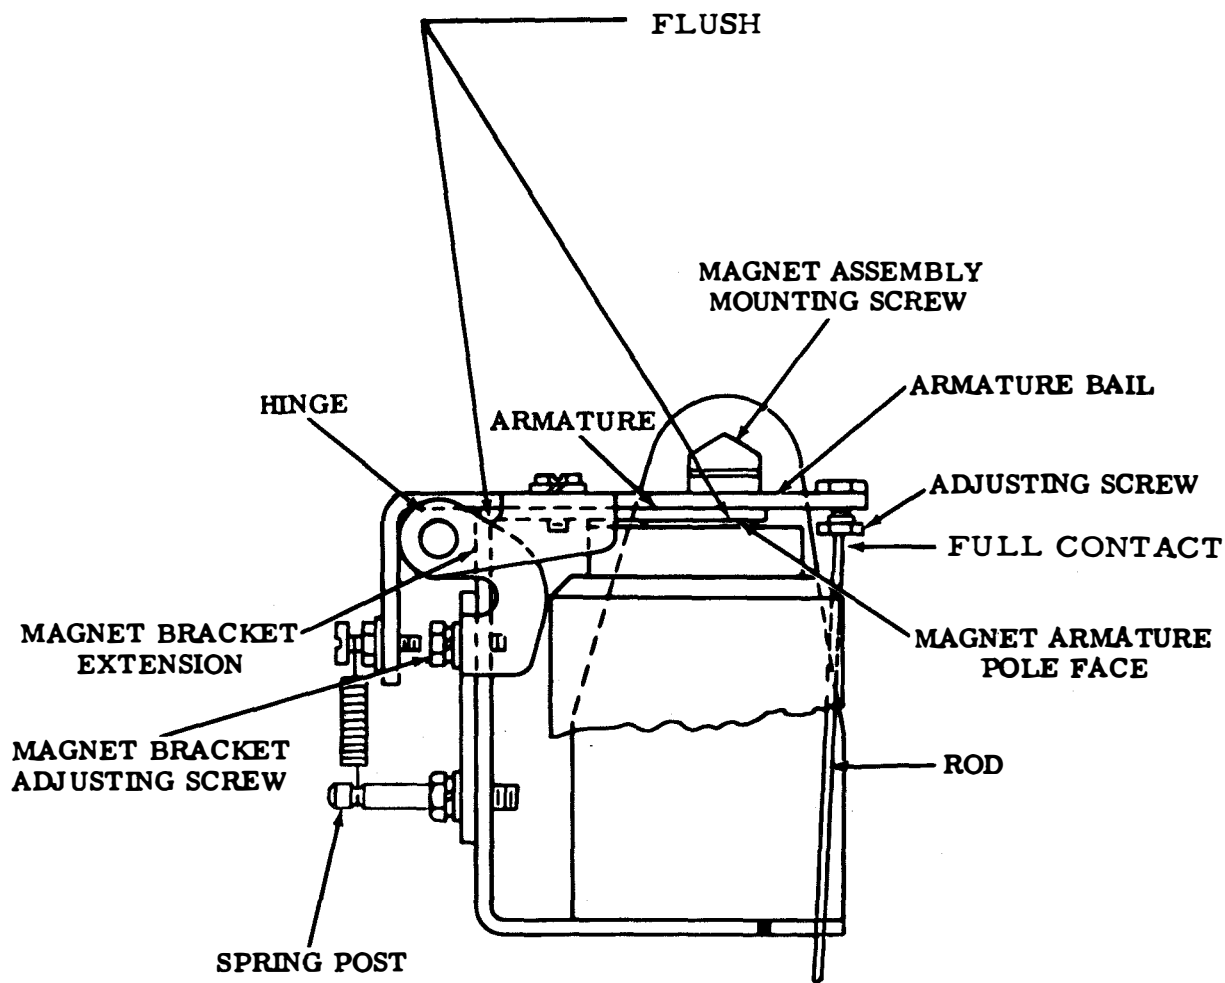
Armature Hinge and Magnet Assembly - Rear View
